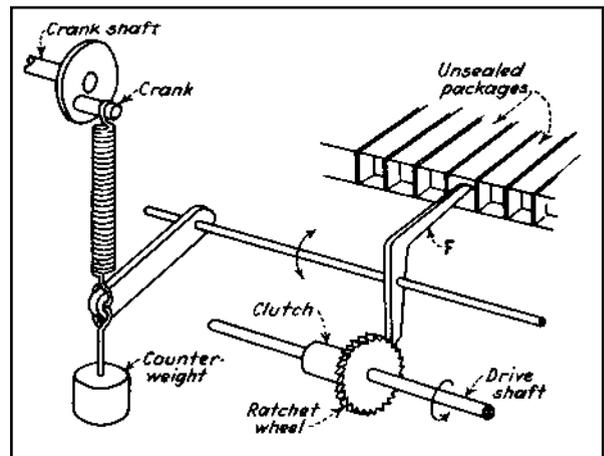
A simple stop mechanism for limiting the stroke of a reciprocating machine member. Arrows indicate the direction of movements.
